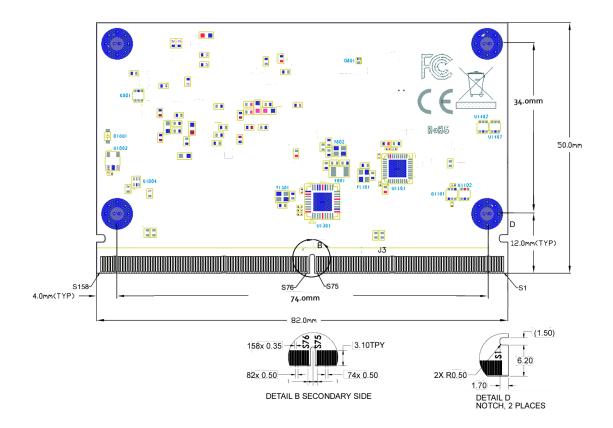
SMARC-iMX93 Mechanical Drawings (Bottom View)
